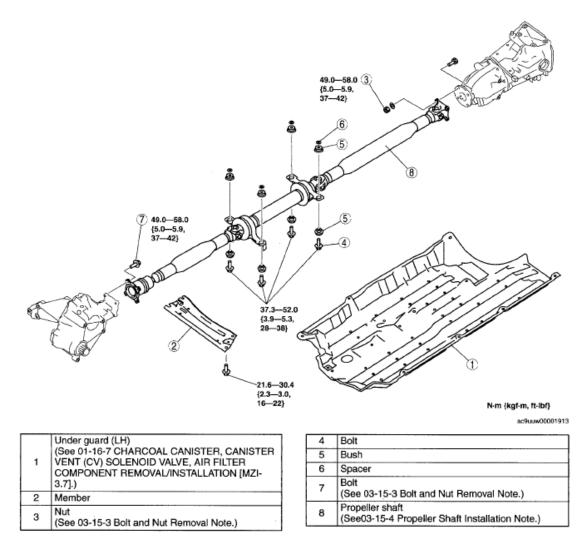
Identifying Propeller Shaft Components & Torque Specifications Courtesy of MAZDA MOTORS CORP.
